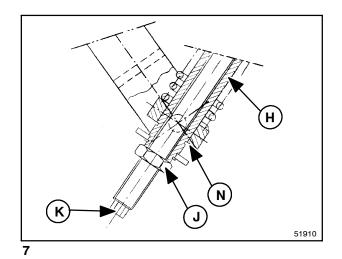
and 7 Correct belt tension (in engaged position): Notch of part H is visible just underneath block G.
